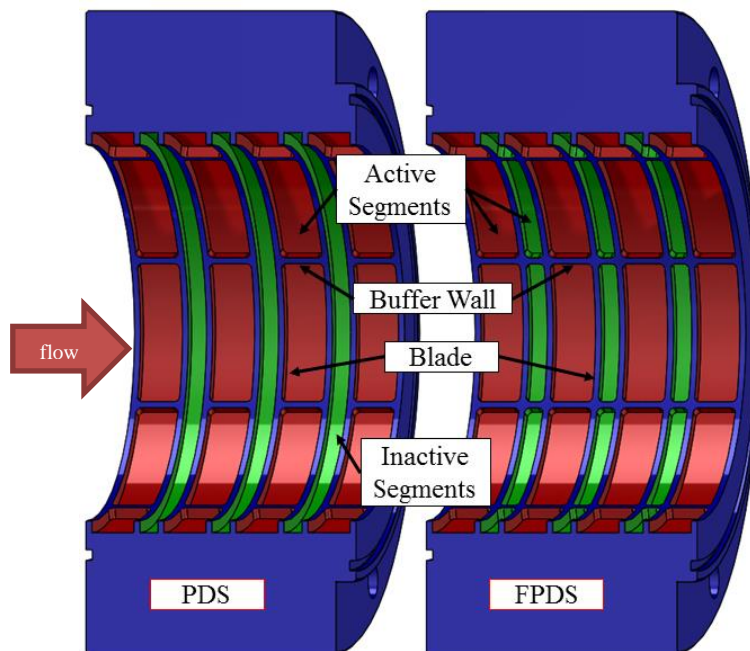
Cut-view of two seals illustrating the differences between a standard PDS and FPDS.
